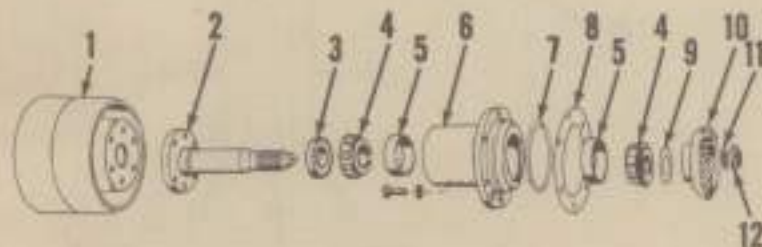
Exploded view of the belt pulley assembly. The pulley drive gear and shifter collar are shown in Fig. 142.
